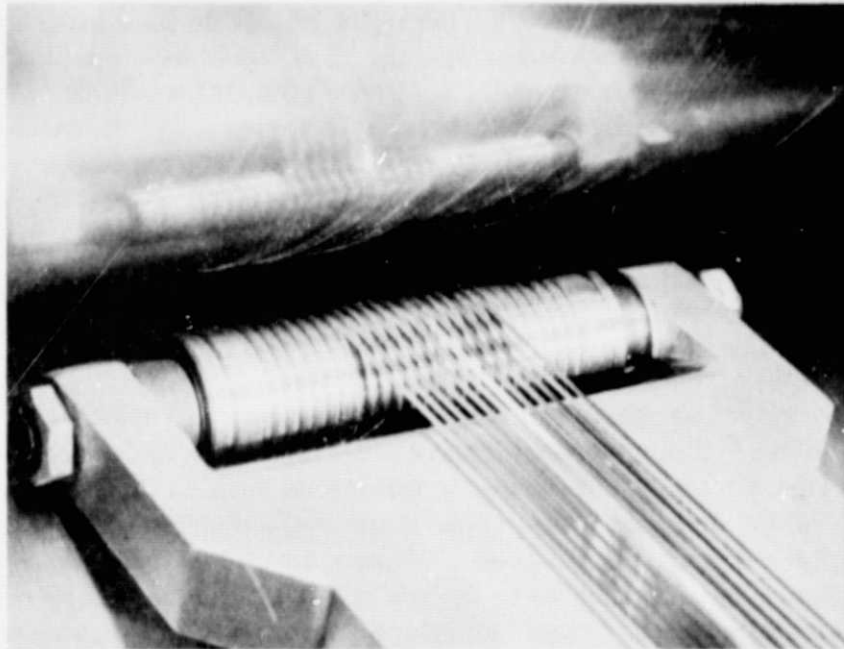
Close-up view of a grooved guide roller for flat conductors in MSFC laminator.
